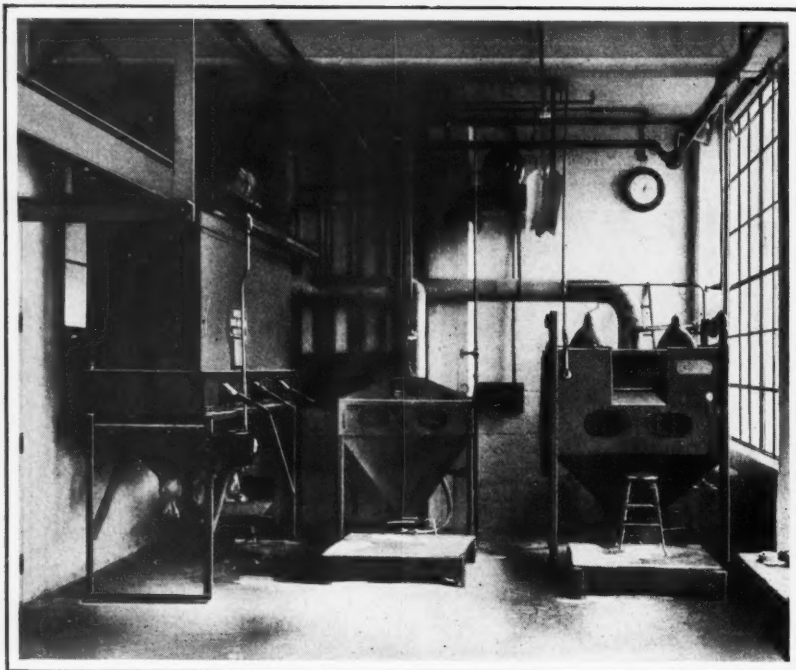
Sand-blasting Equipment at the Other End of the Hardening Room Shown in Fig. 1
